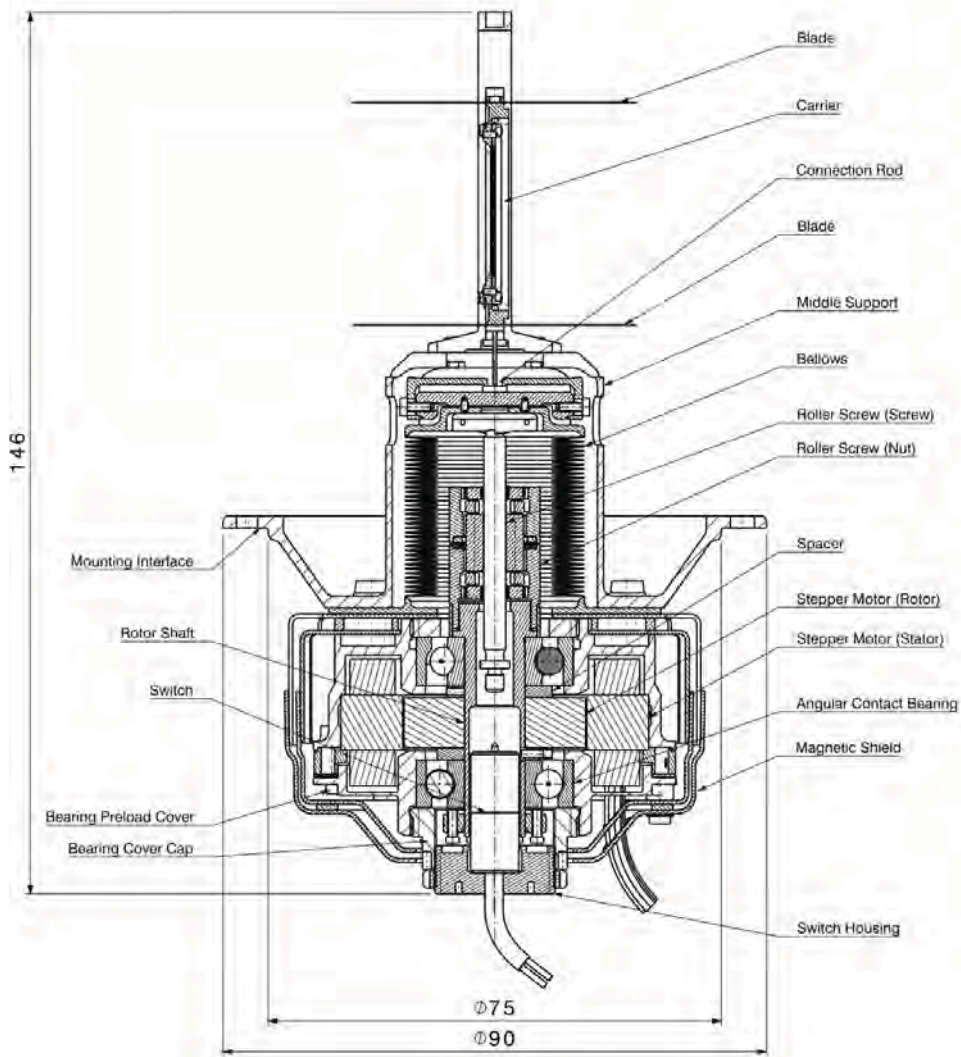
Cut view of the linear Slit Change Mechanism design – dimensions in mm
